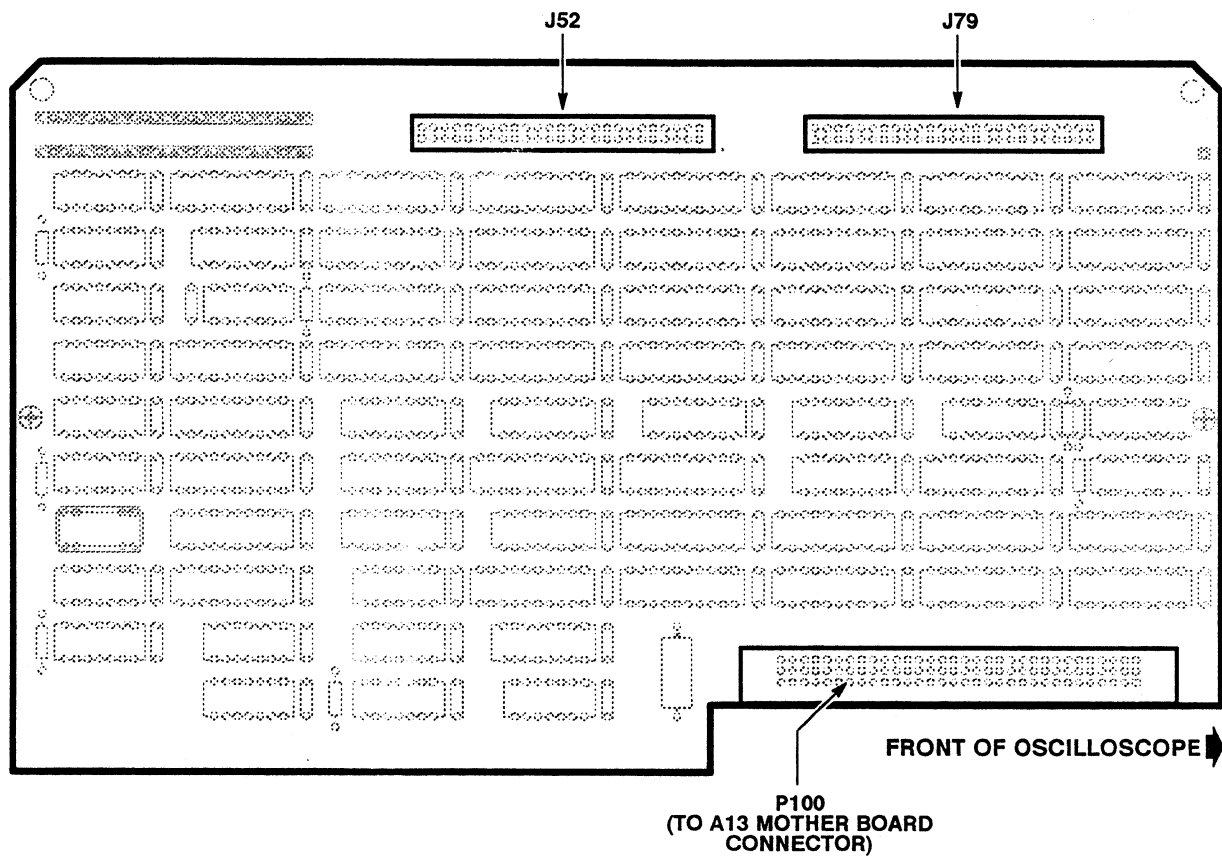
Removing and Replacing the A16 Waveform Compressor Board
